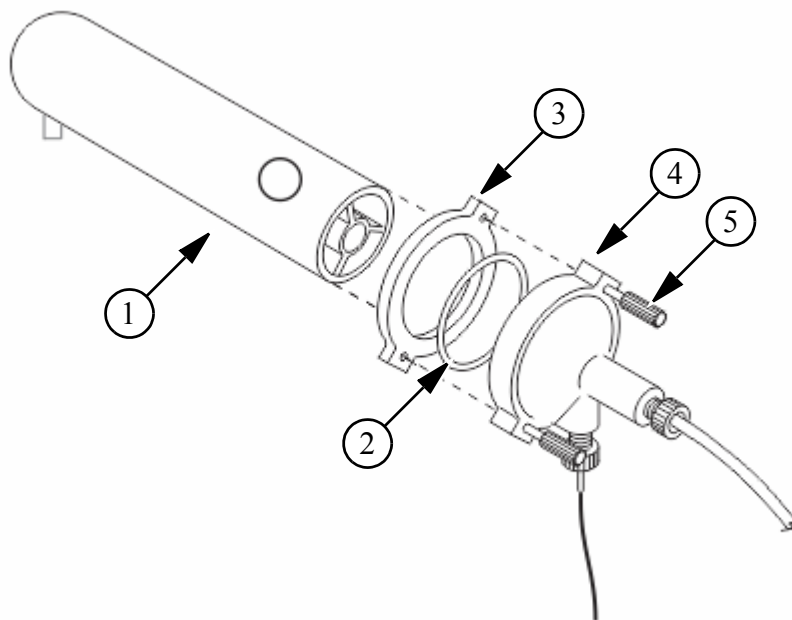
Spray chamber, end cap, and associated parts. (Illustration shows cross-flow nebulizer end cap assembly, Part No. N0780546.)
